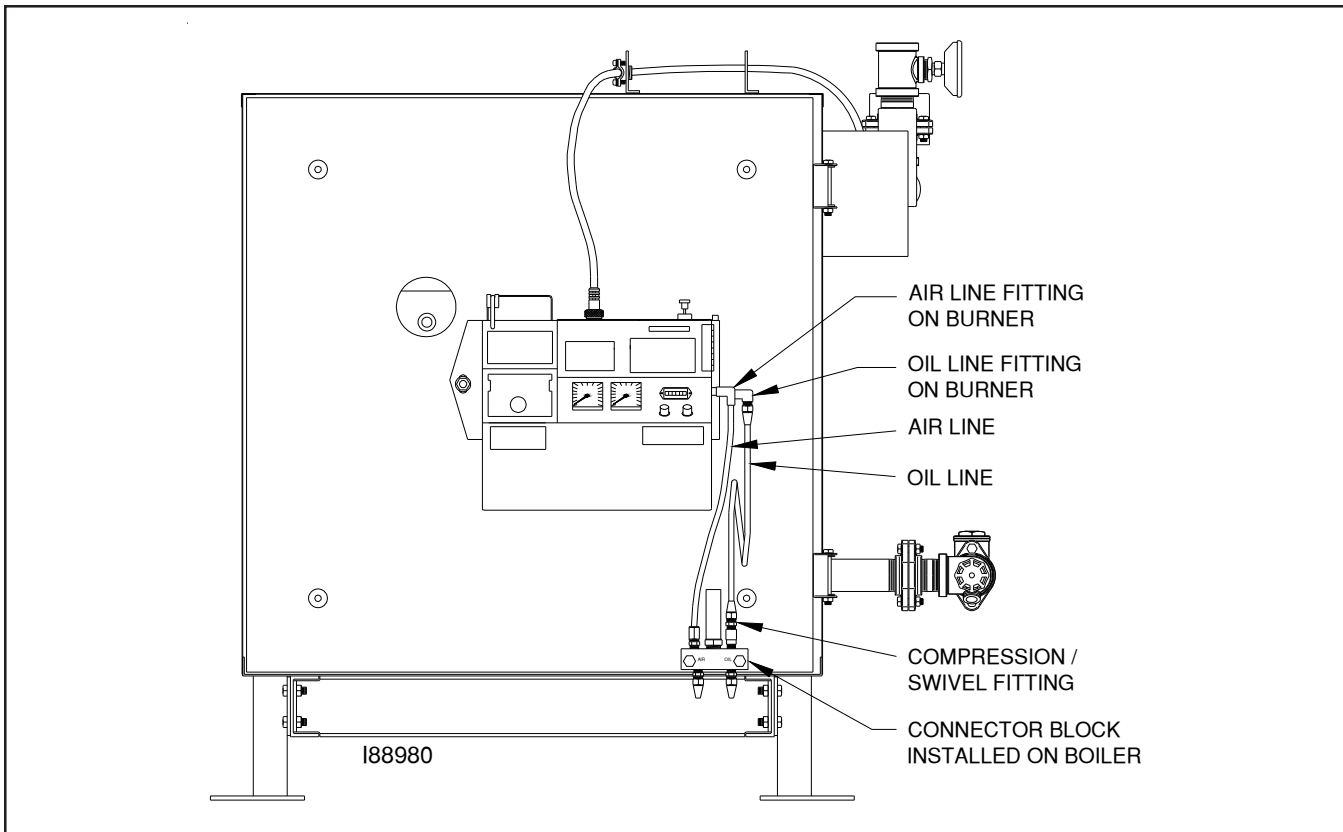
J - Installation of Connector Block, Oil Line and Air Line (Front View)
